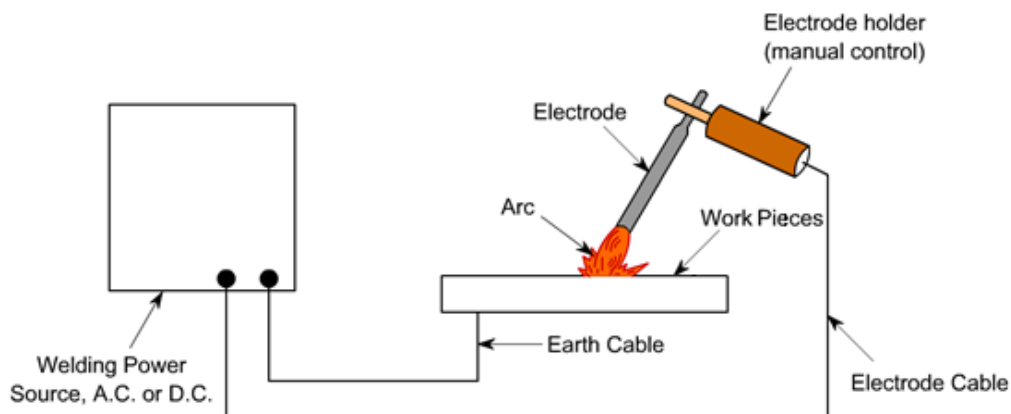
Circuit diagram of shielded metal arc welding process.
